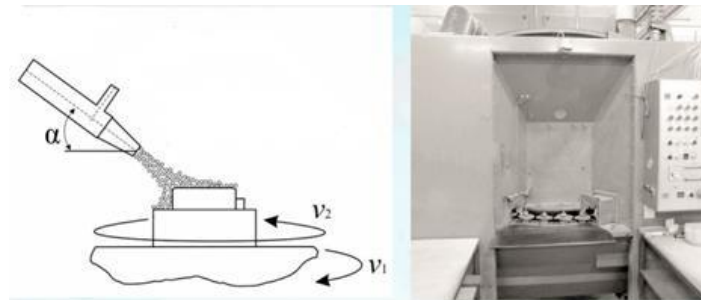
Scheme of air abrasive machining and a picture of machining chamber [3]
